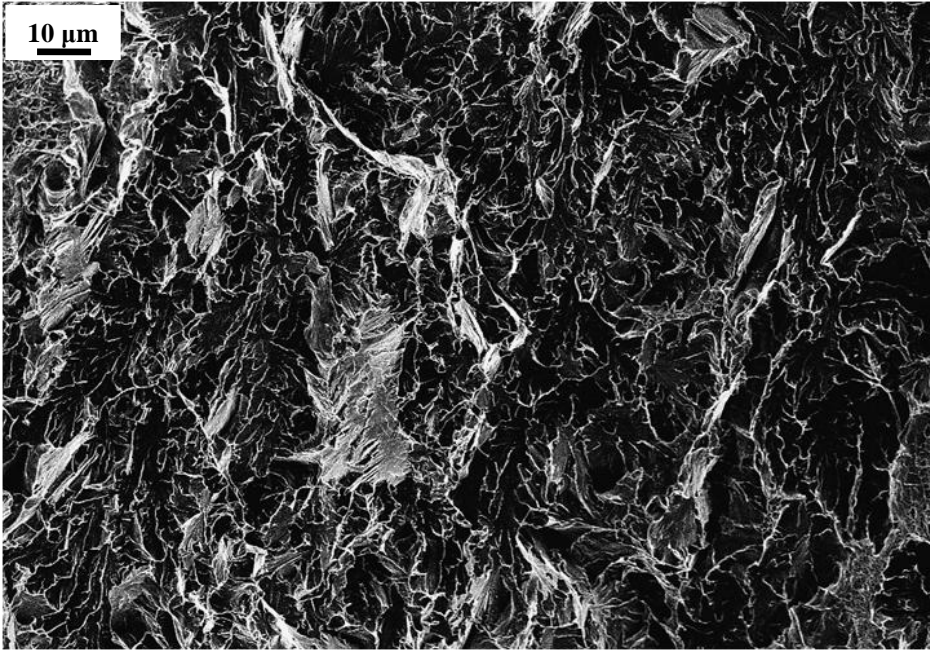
Fracture surfaces of L-T orientation specimen at -100 °C in X70_A steel.
